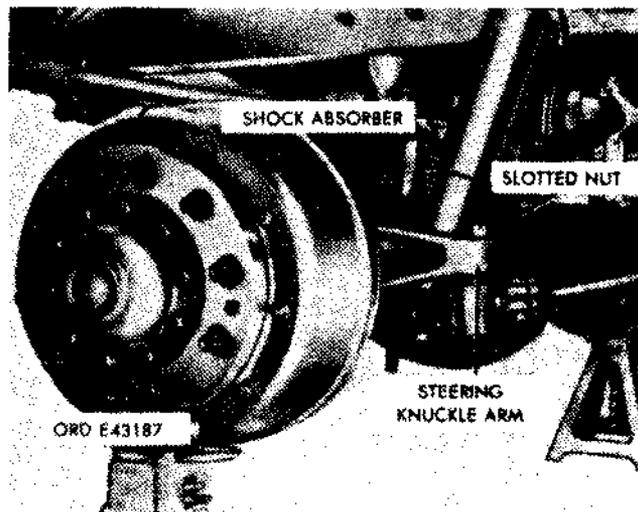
Front axle assembly with wheel and tire assembly removed.
